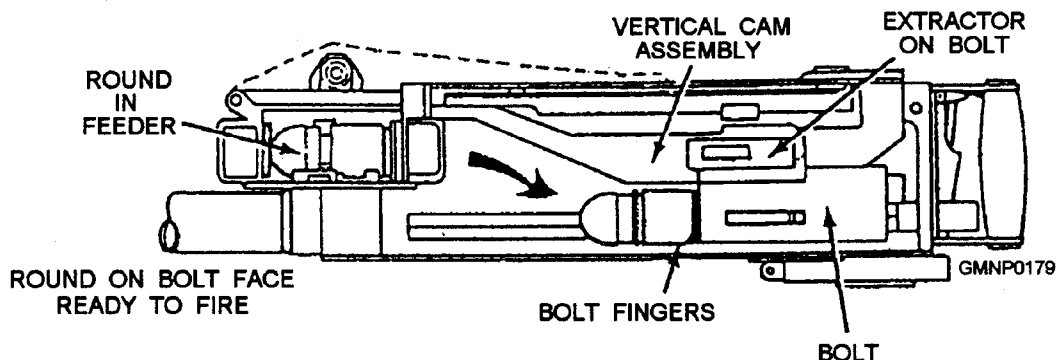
M19 Mod 3 machine gun loading operation.
